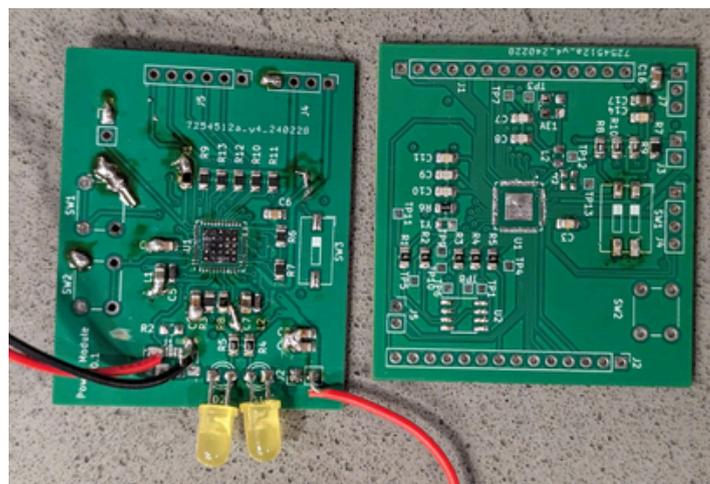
, 2 Physical PCBs. Chips were removed and reused in the next revision to lower costs.
